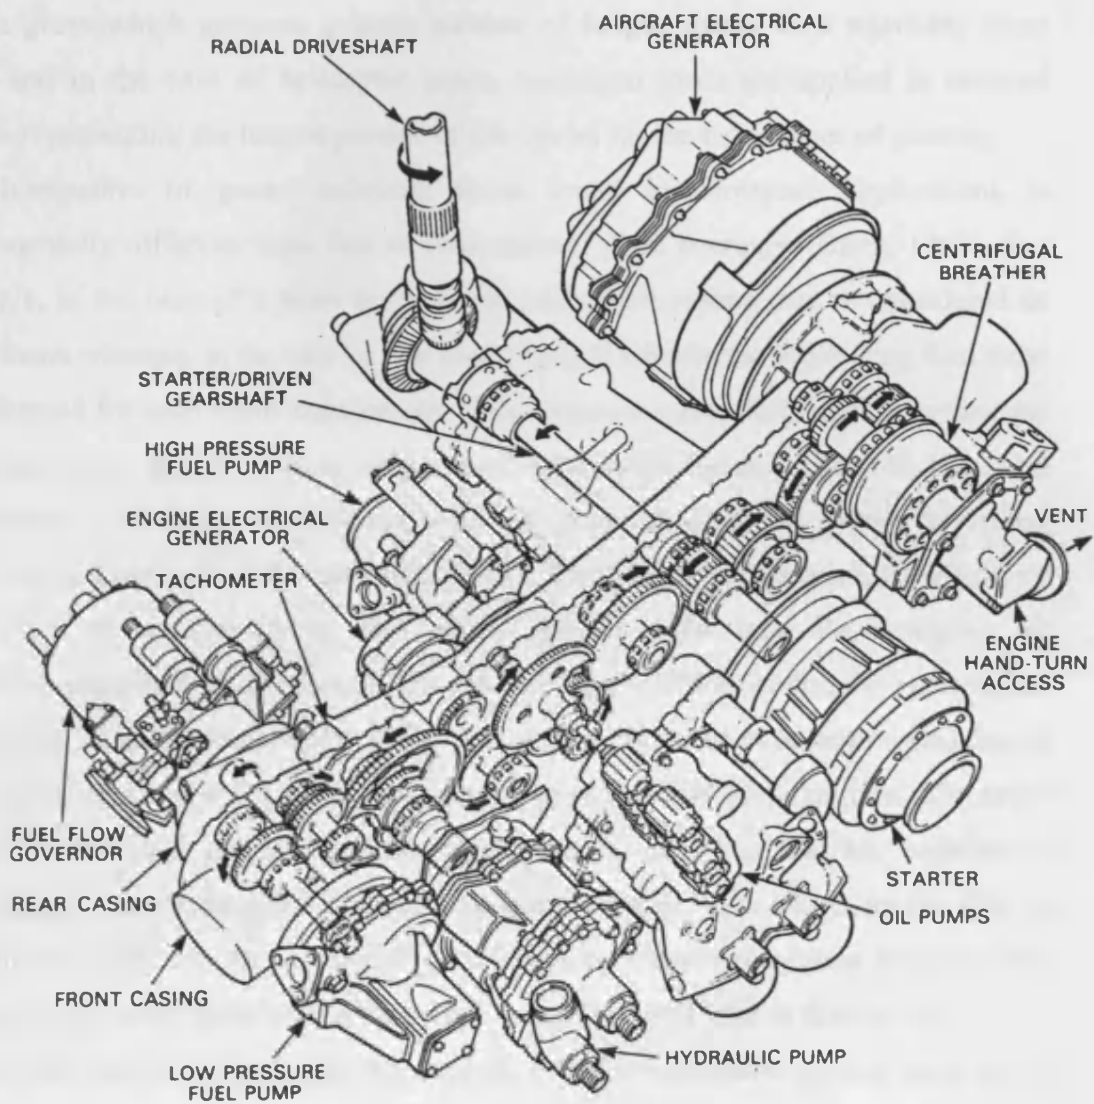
Cutaway drawing of a typical gas turbine engine Accessory Gearbox (AGB) (from Rolls Royce)
